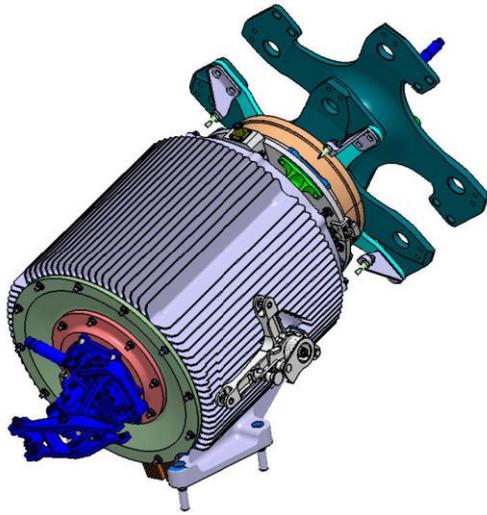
The final ETR machine design. The pitch actuator and tail rotor hub are shown fitted
